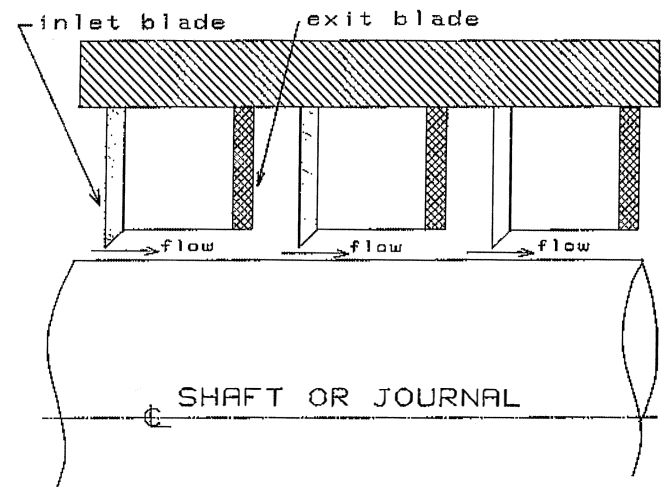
Conceptual Drawing of a Six Bladed Pocket Damper Seal Section with Exaggerated Clearances.
